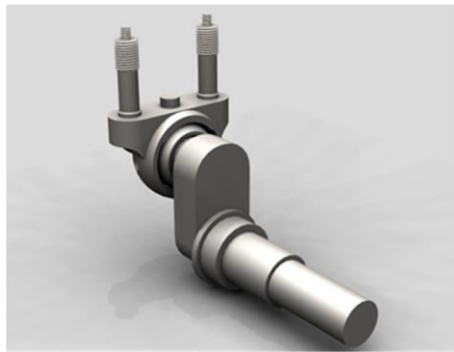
CAD model of ball-and socket joint arrangement used in the Burt-McCollum sleeve as used in the Bristol Centaurus aero engine. The sleeve drive peg is on the crank that was in turn driven by a half-engine-speed gear in this engine. Reproduced from [17].
